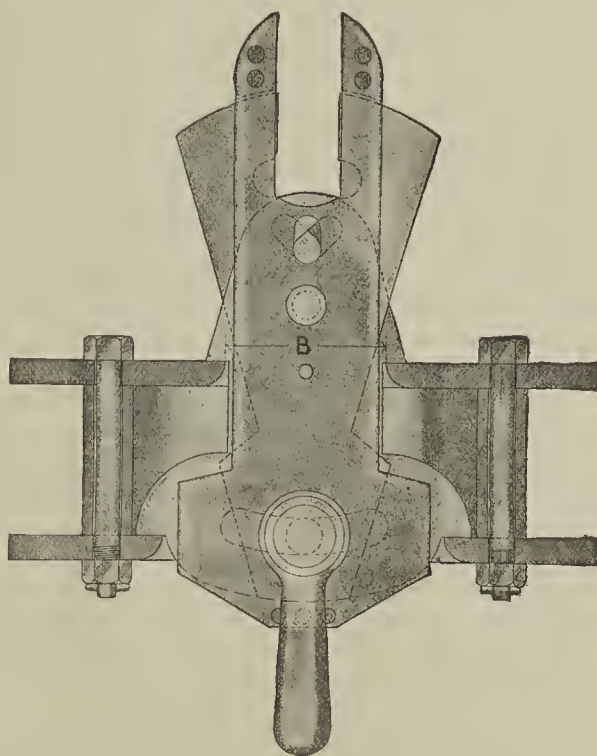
SECTIONAL VIEW OF HOOK IN POSITION AFTER OVERWIND.
